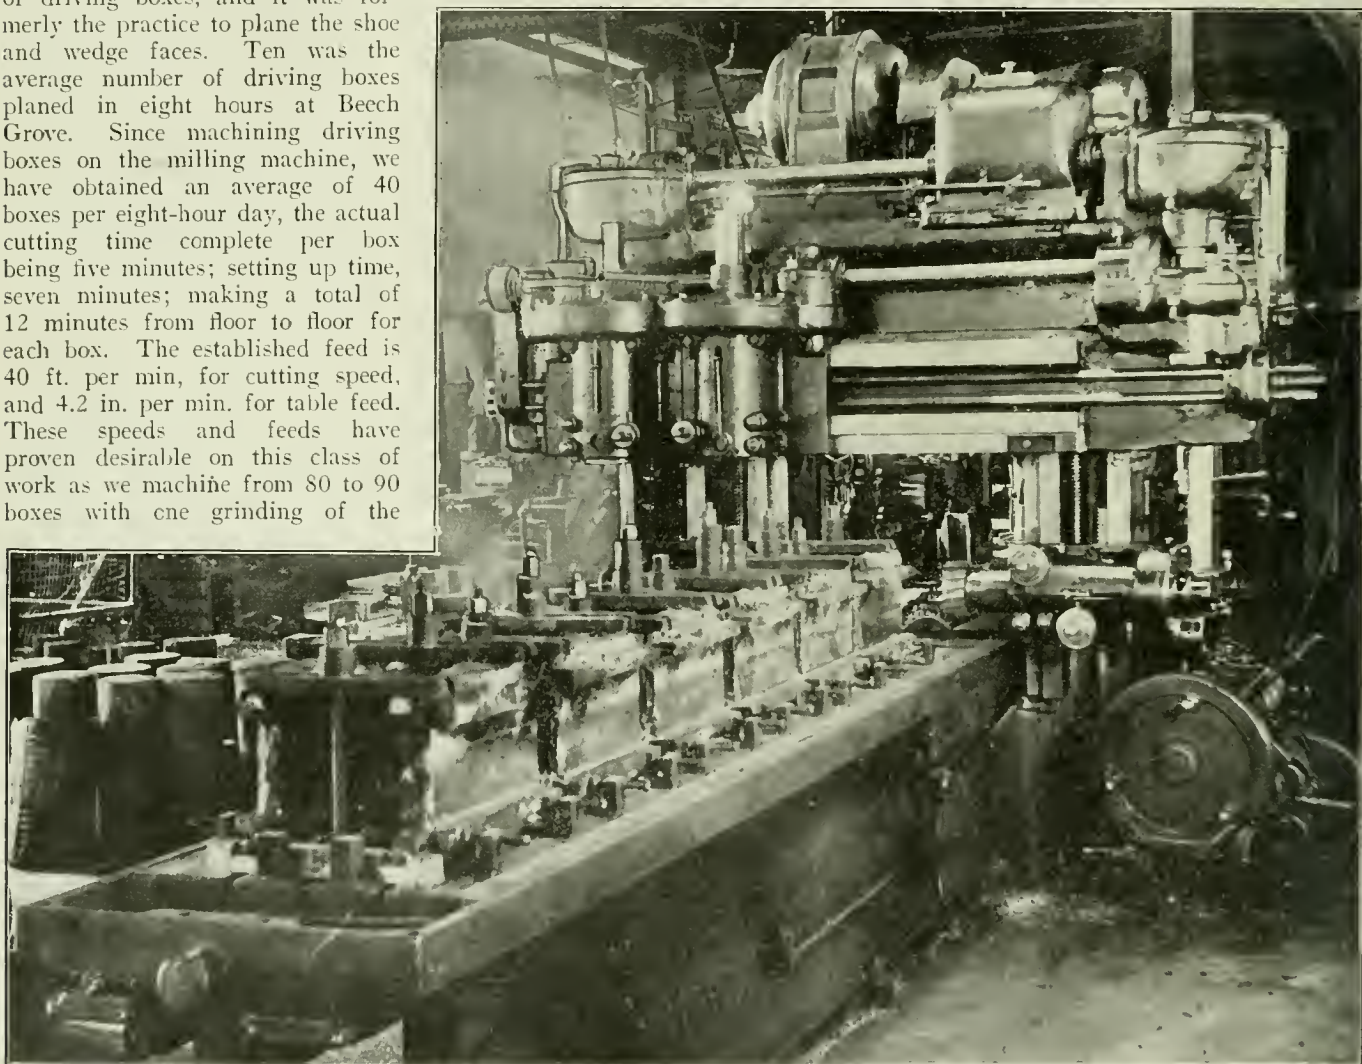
Ingersoll 32-In. by 24-In. by 14-Ft. Milling Machine Equipped for the Rapid Machining of Driving Box Shoe and Wedge Ways
